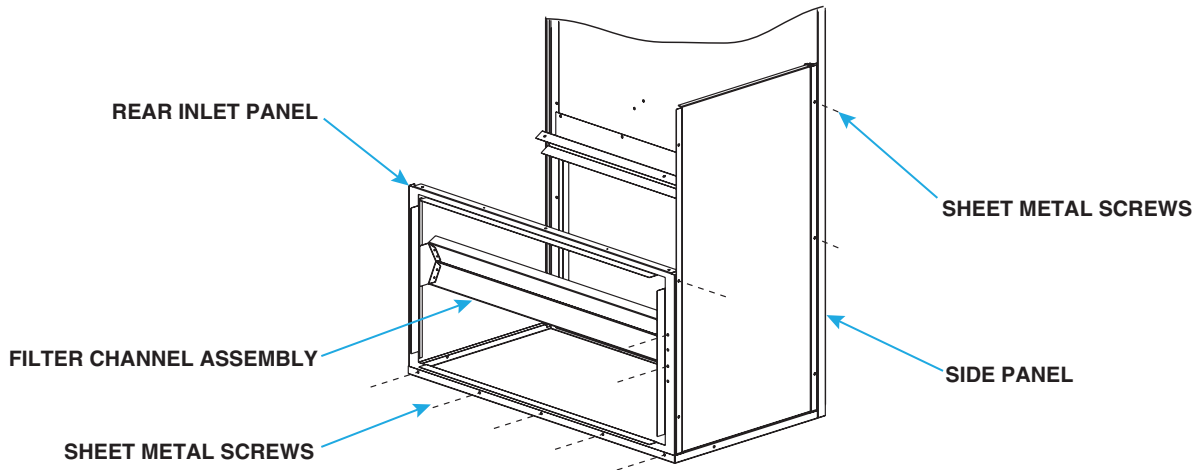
Install Side and Rear Inlet Panels and Filter Channel Assembly
